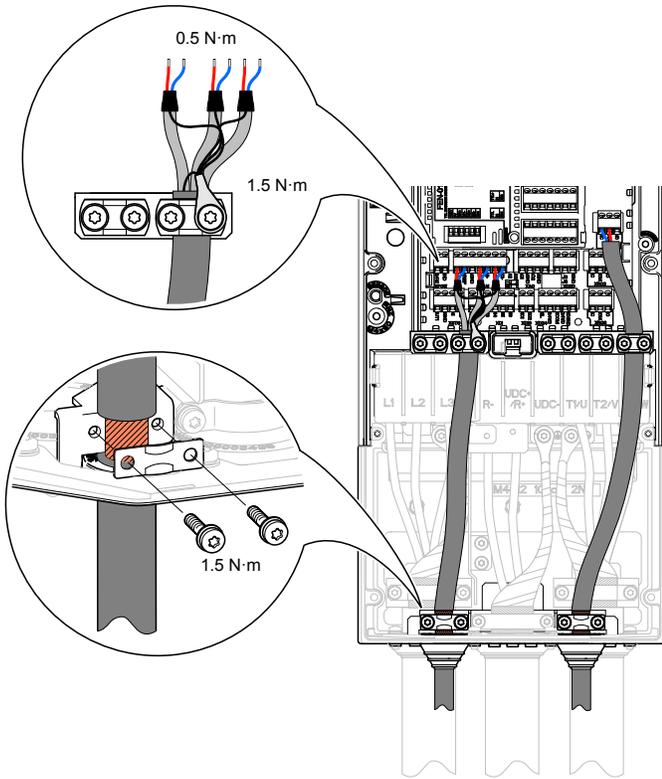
Cable Conduit Installation R6, R7, R8, R9
